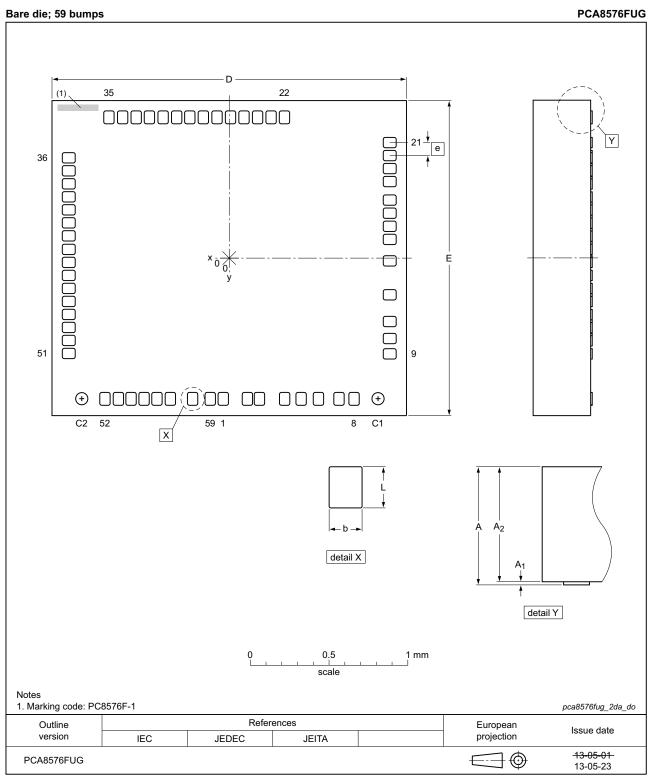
Bare die outline PCA8576FUG (for dimensions see Table 24)
